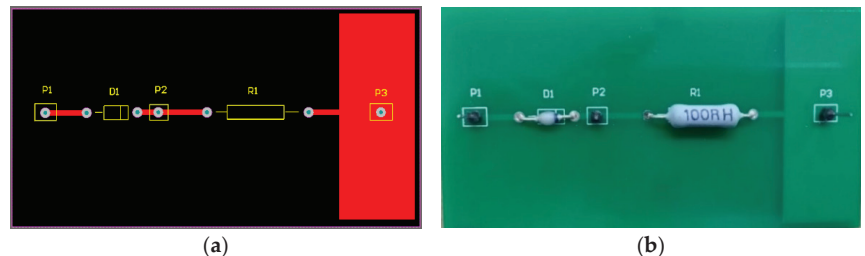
PCB board for model verification (a) design drawing; (b) Processed circuit board.
